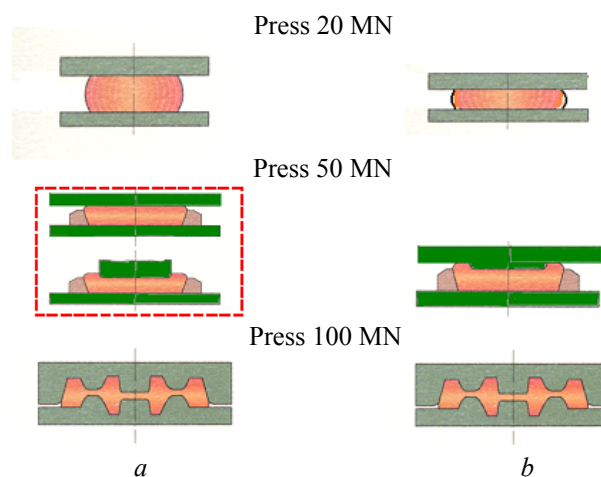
Scheme of wheel blank deformation at Vyksa Steel Works: *a* – initial scheme; *b* – scheme with combination of upsetting and spread
